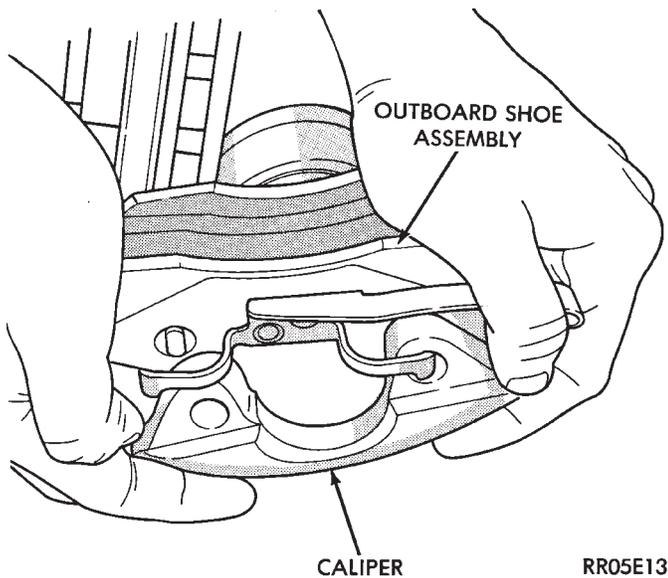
Installing Outboard Shoe Assembly onto Caliper
